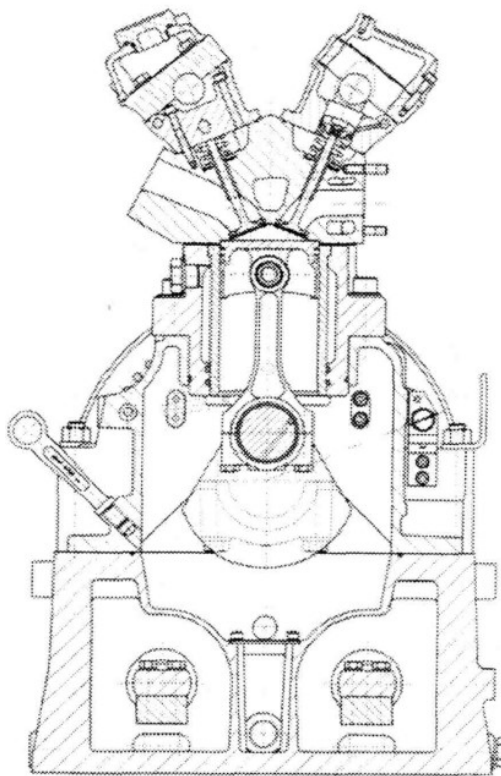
Technical drawing the single cylinder engine used in the reference paper by Eichlseder et al. [52]
